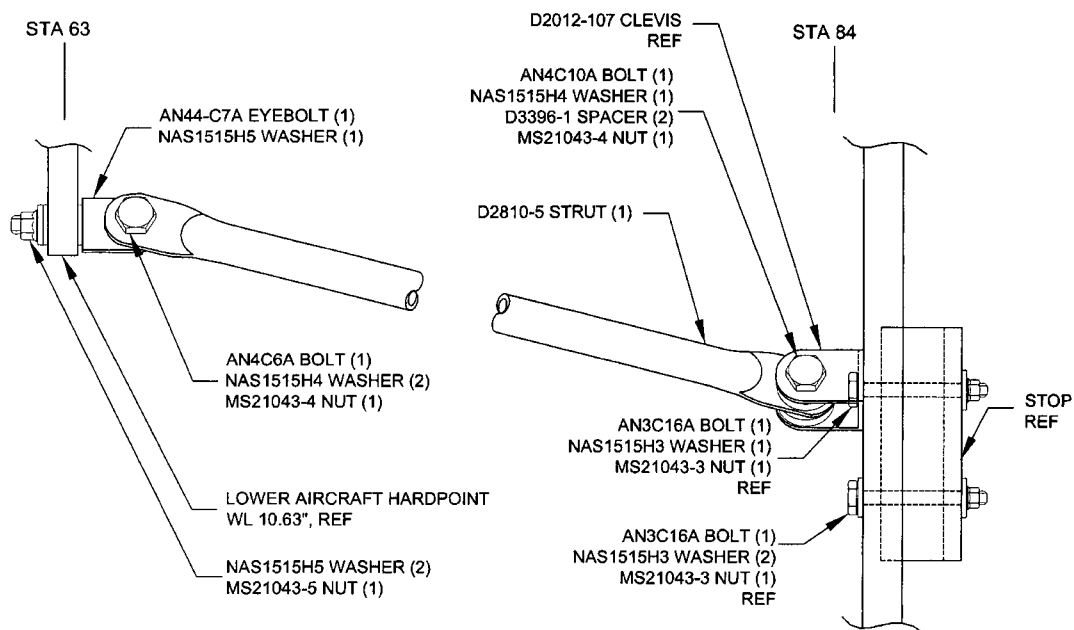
Strut Detail for D412-630-033/-034 *Heli-Access-Step™* Installation
